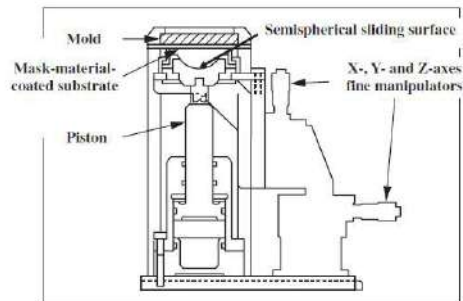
Schematic of the pressing machine for molded mask fabrication process.¹⁴⁾
